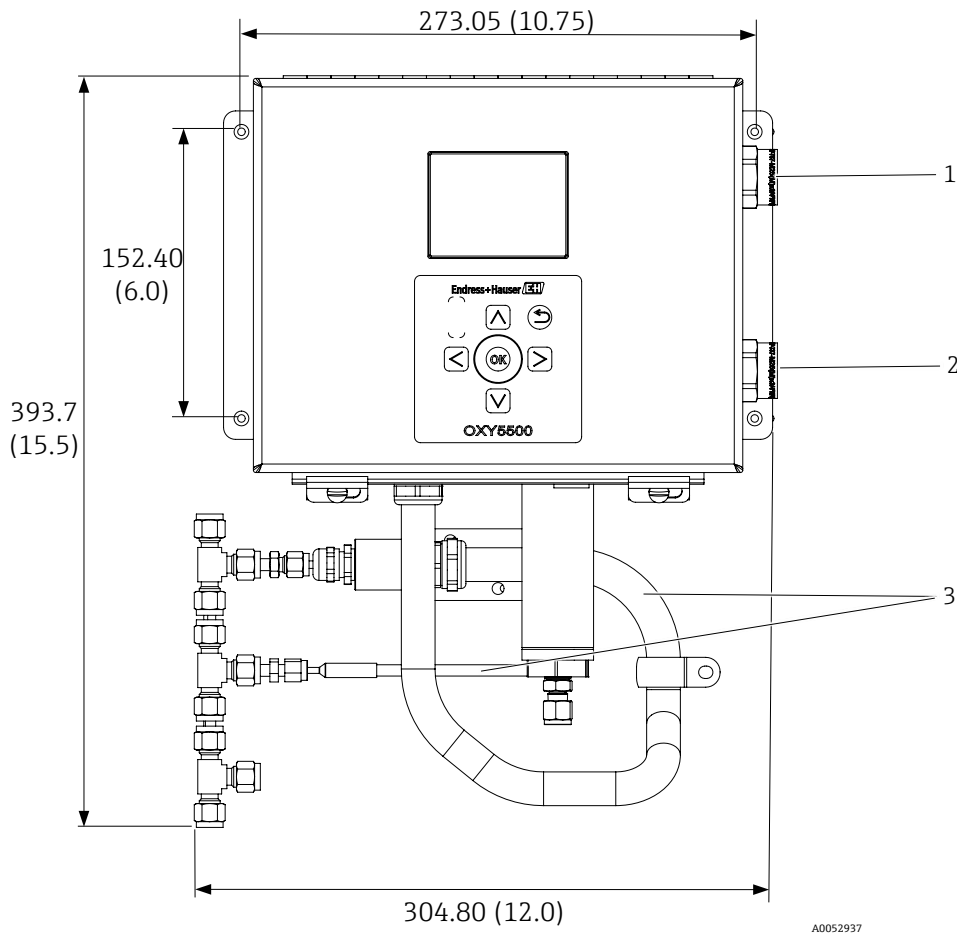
Outline and mounting dimensions - panel mount. Dimensions: mm(in)
